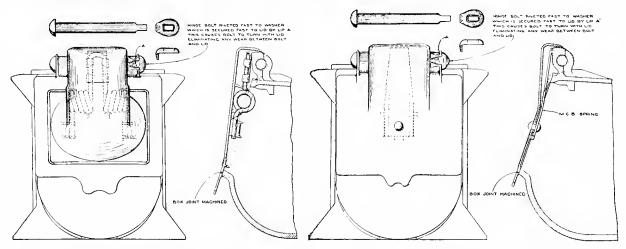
Symington M. C. B. Freight Car Journal Box with Torsion Spring Lid.
